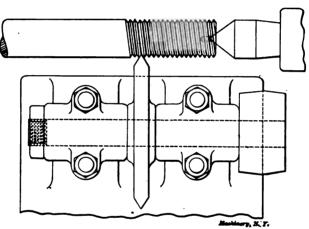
Cutting Thread by a Rapidly Revolving Hardened Steel Disk.
